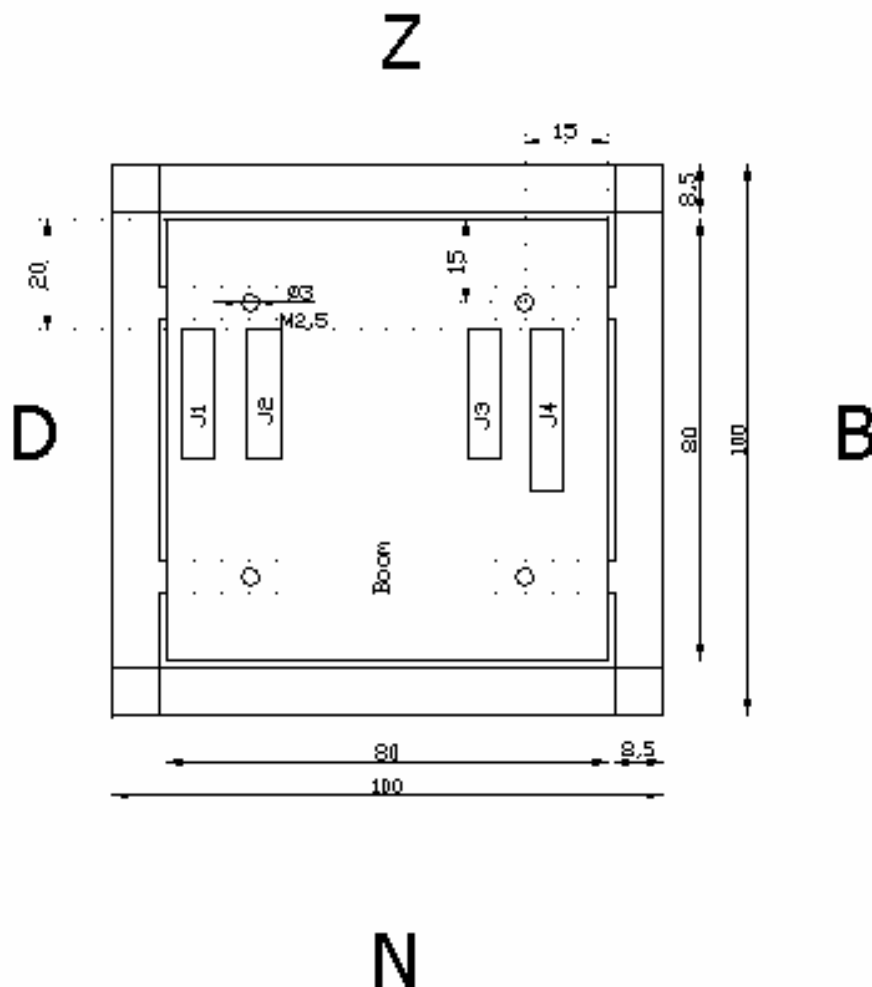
The backplane when locking in through the A side of the structure. All the measurements is in millimeters.
